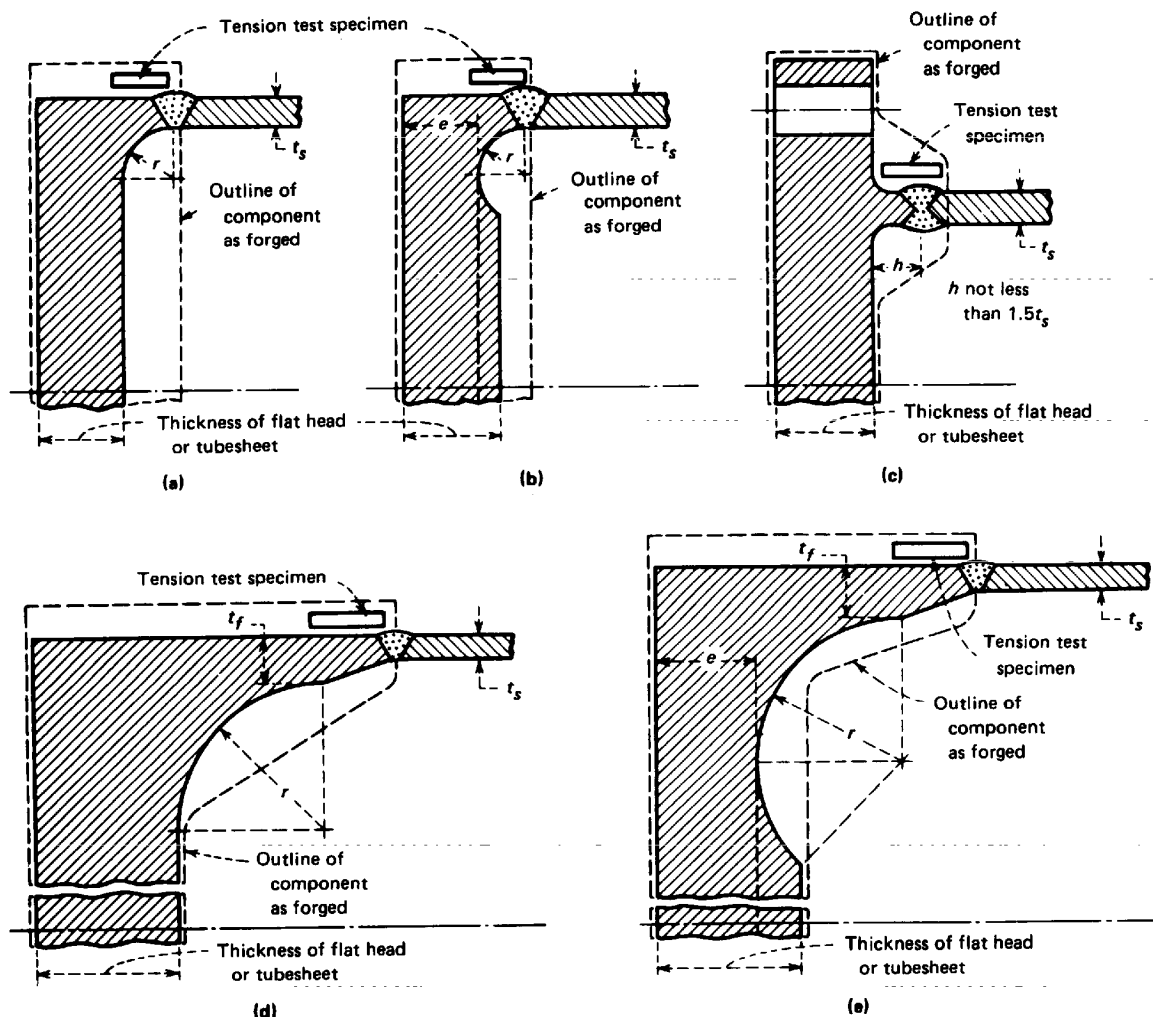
ATTACHMENT OF PRESSURE PARTS TO PLATES TO FORM A CORNER JOINT (CONT'D)
